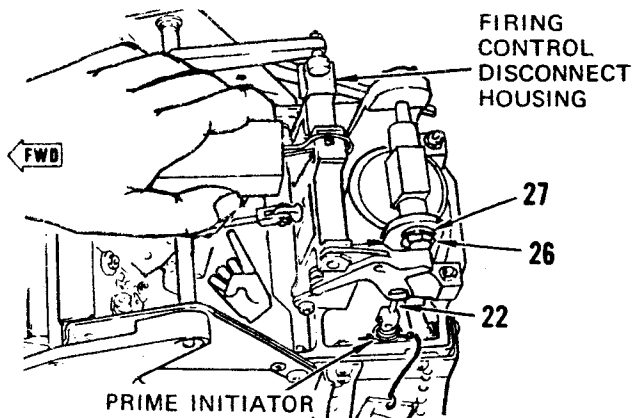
Ejection Seat Removal and Installation (Sheet 9)
